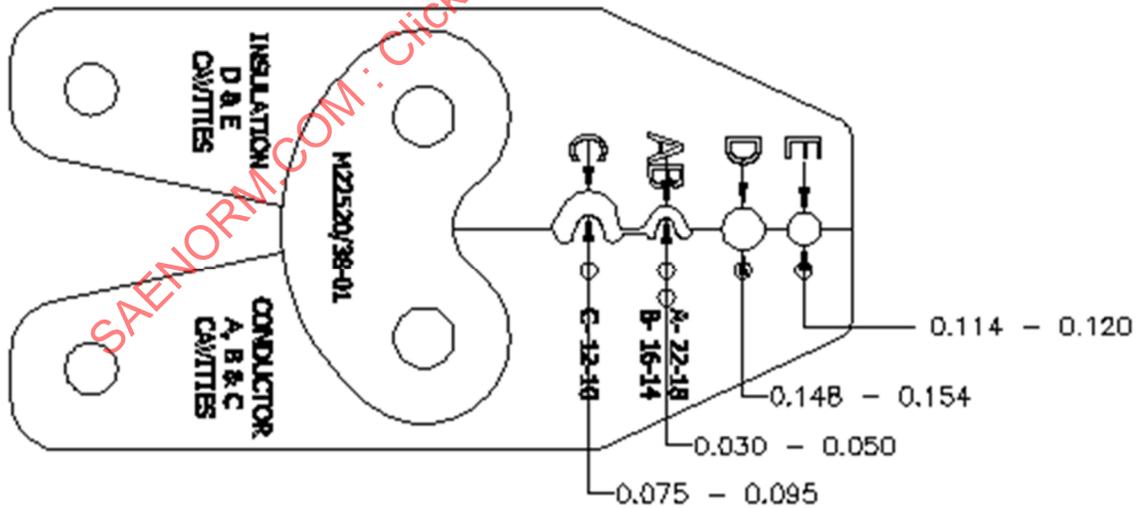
M22520/38-01 CRIMPING TOOL CRIMP CAVITY DIMENSIONS
